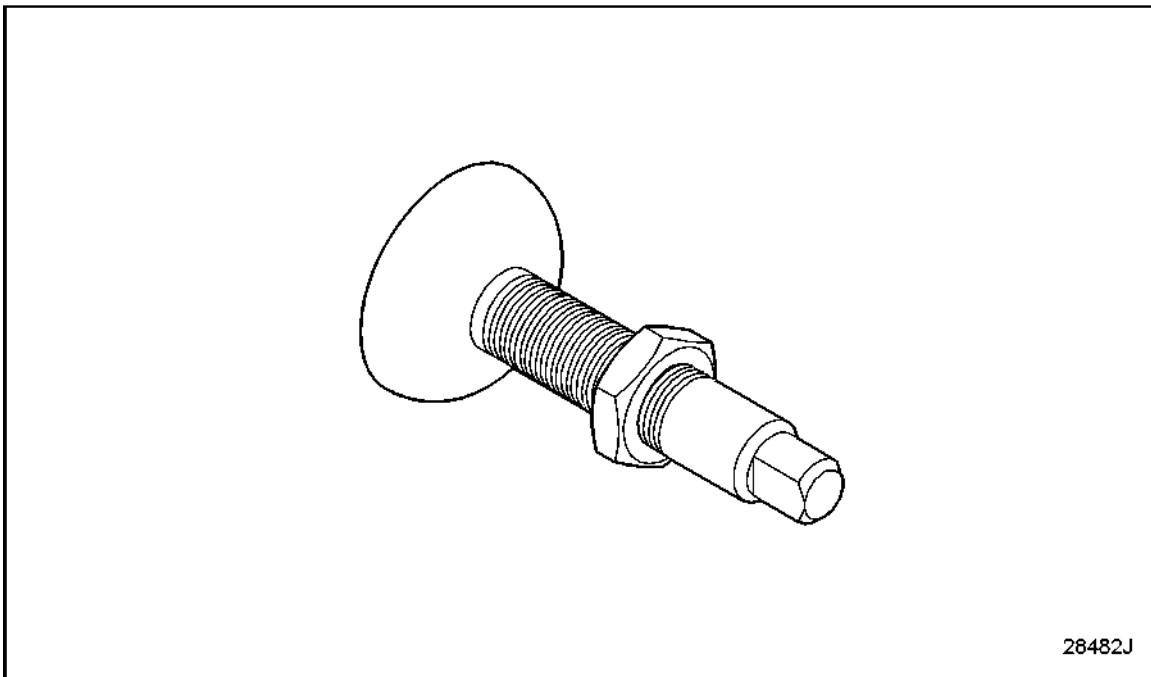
Rear Seal Expander Adapter,J 23341
